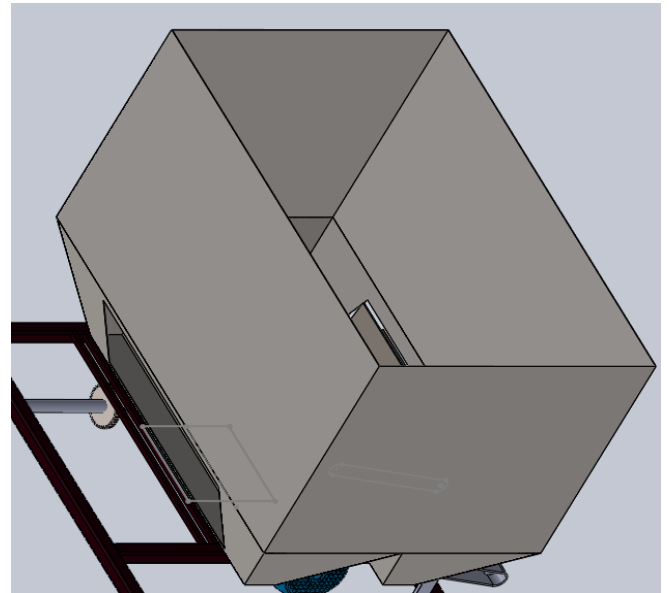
Feed storage showing cuts for thrower and rotating parts.
